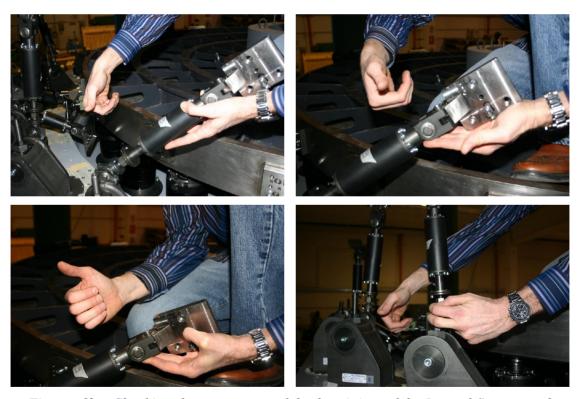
Checking the movements of the four joints of the Lateral Supports: the right hand thumb is parallel to the joint axis
